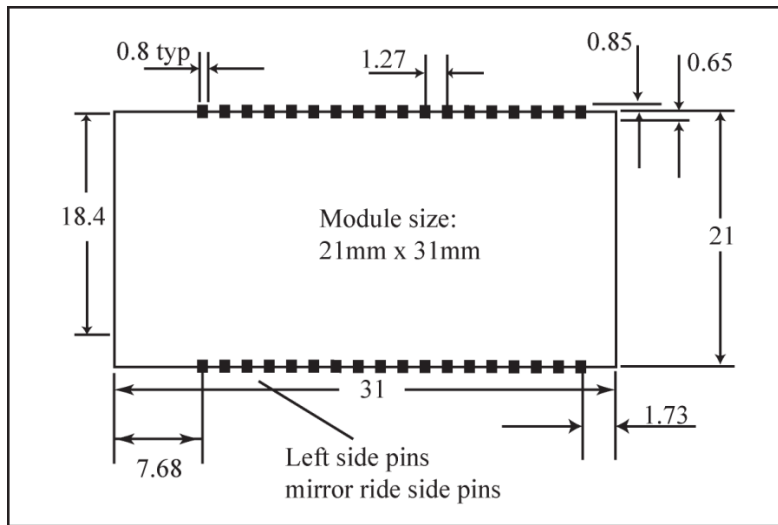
ZG2100M/ZG2101M Module Layout Pad Dimensions
